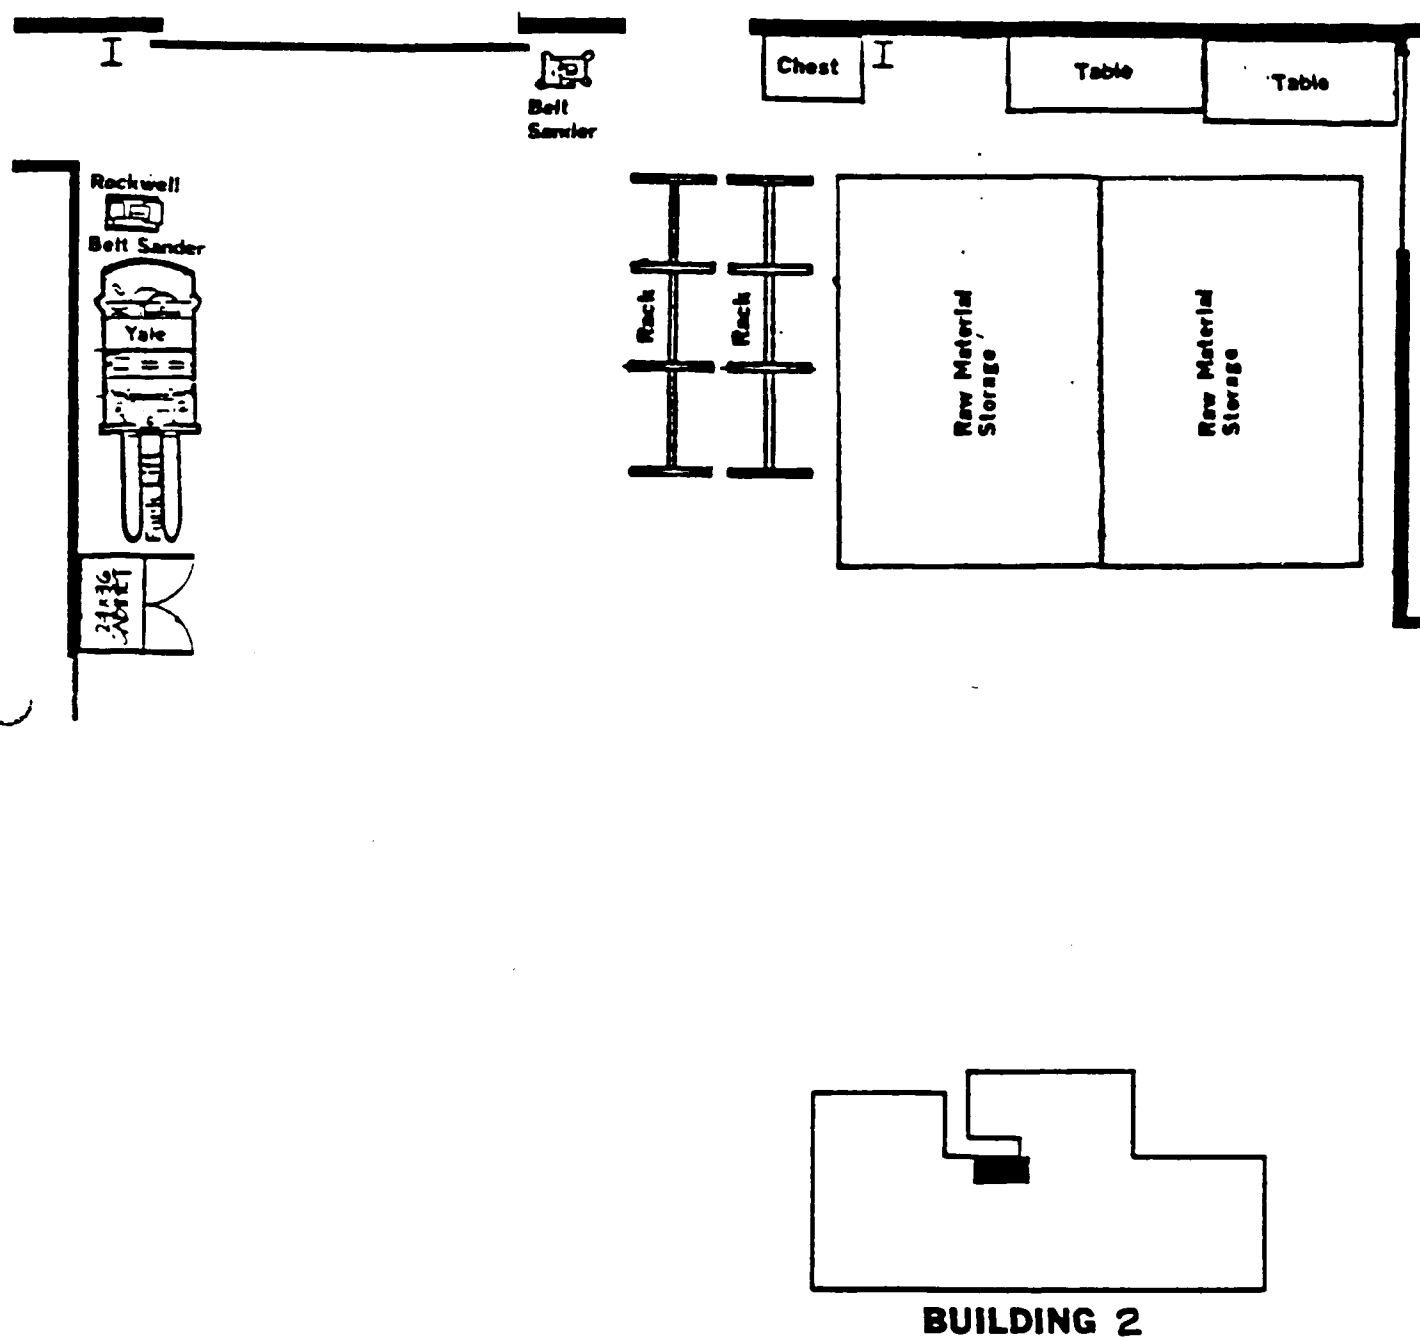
RAW STOCK STORAGE AREA LAYOUT
